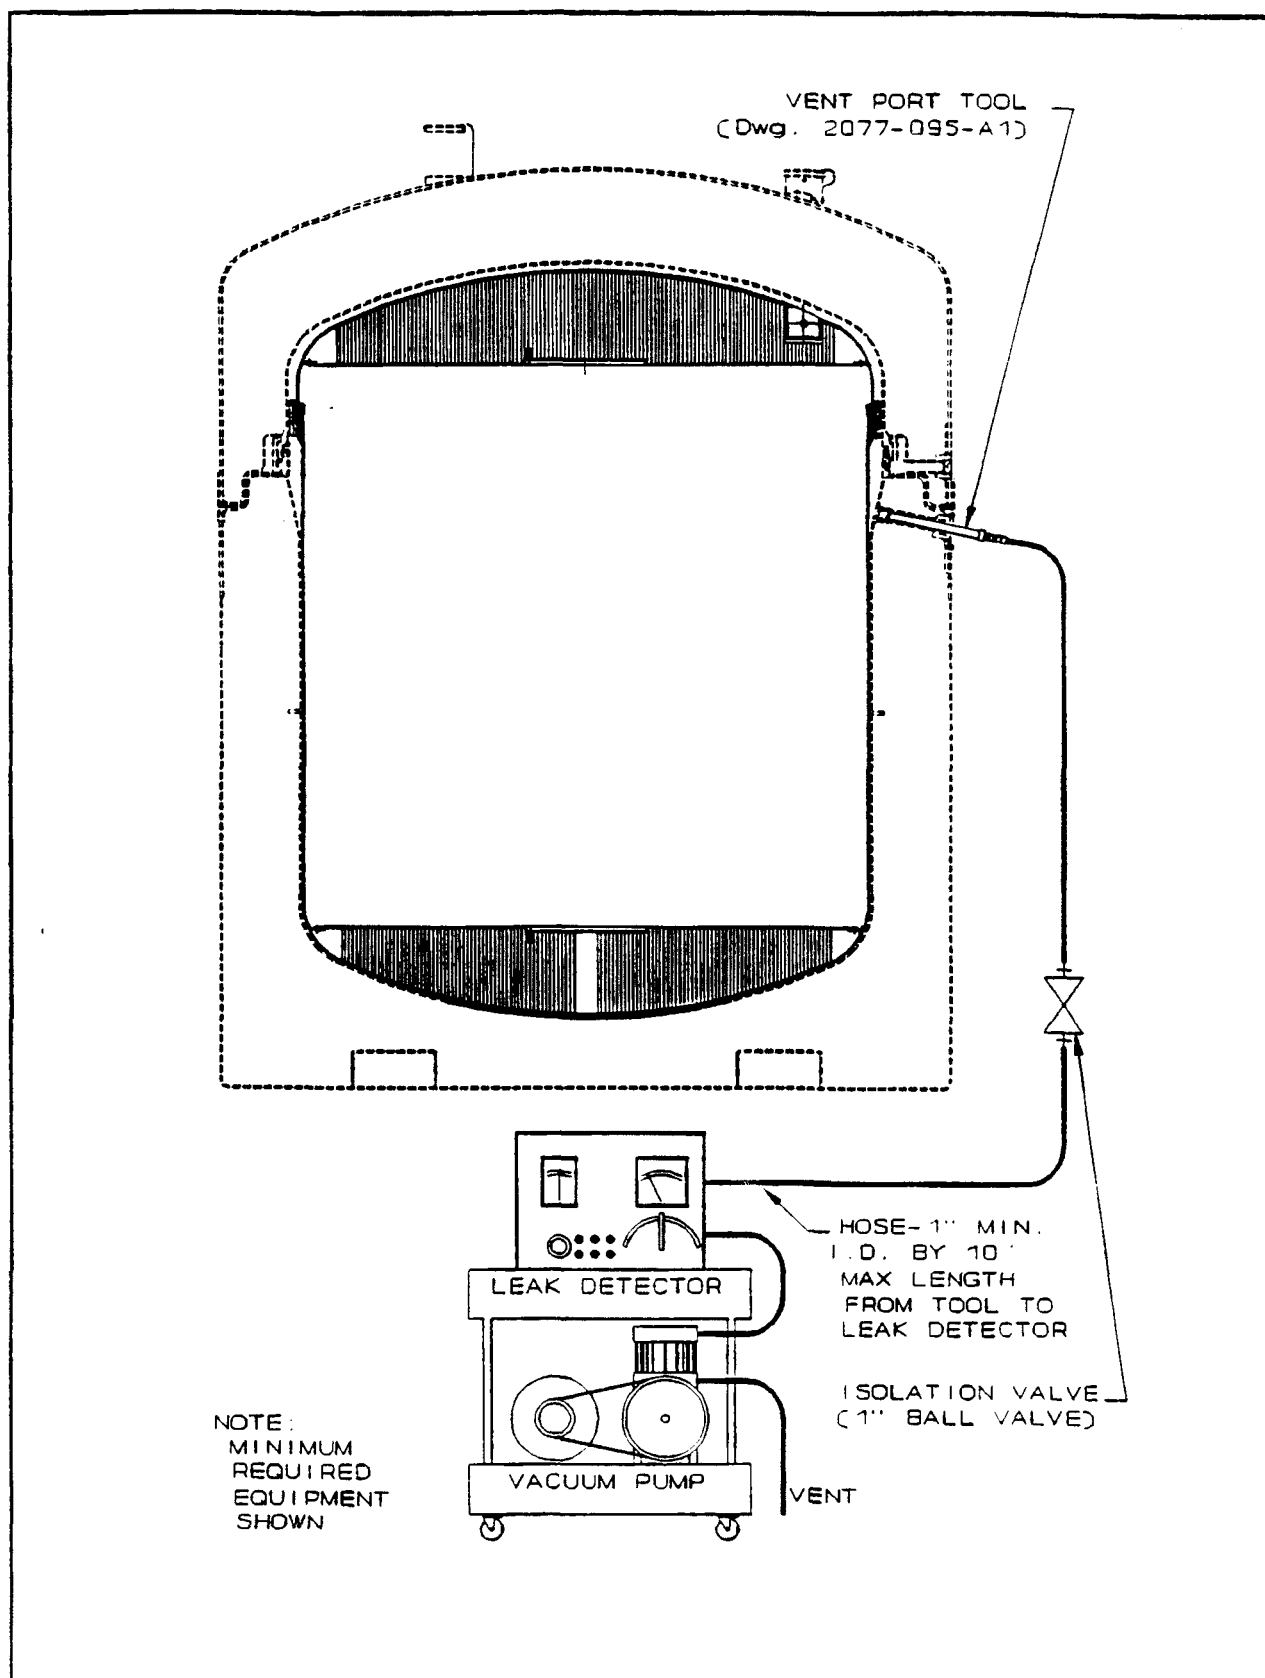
Vessel Weld Leak Test Setup Support Arrangement for Assembled CV
